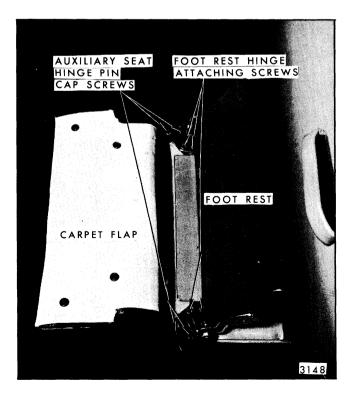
Auxiliary Seat Assembly - Removal and Installation - Cadillac Limousine Styles
